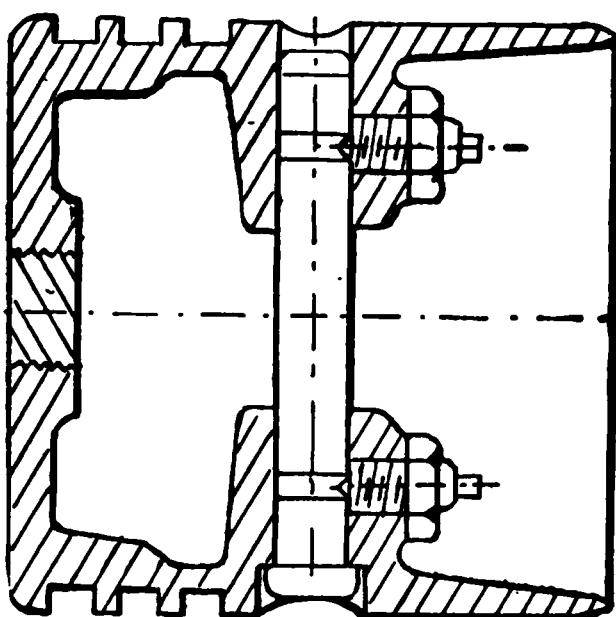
Section through a typical Trunk Piston for a Gasoline Engine. Around the circumference, near the rear end, are three circular grooves for inserting the packing rings. Through the central diameter is a perforation for admitting the piston pin, which is held in place by square-headed screws.
